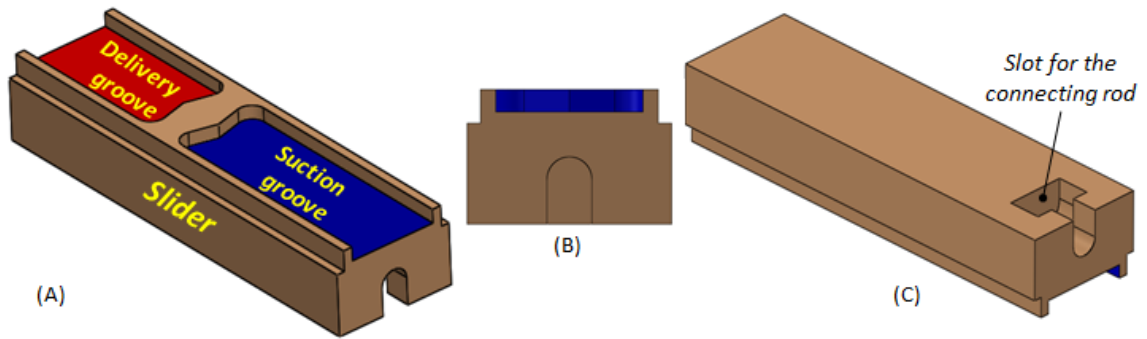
(A) Design of the slider showing the grooves; (B) Side view of the slider showing its cross-section; (C) Bottom view of the slider.
